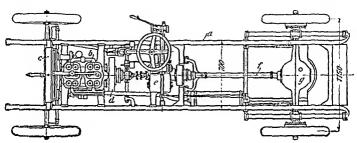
PLAN OF 4-CYLINDER PETROL MOTOR, GEAR-DRIVEN
